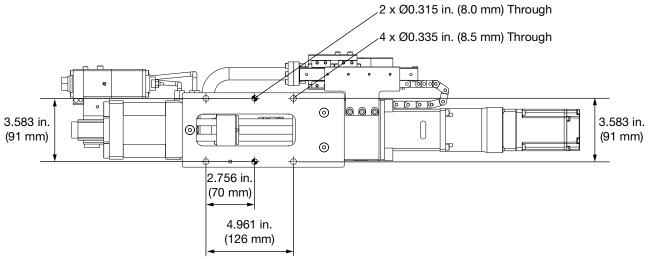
Mounting Hole Dimensions for Installing the PSM Machine - 100cc
